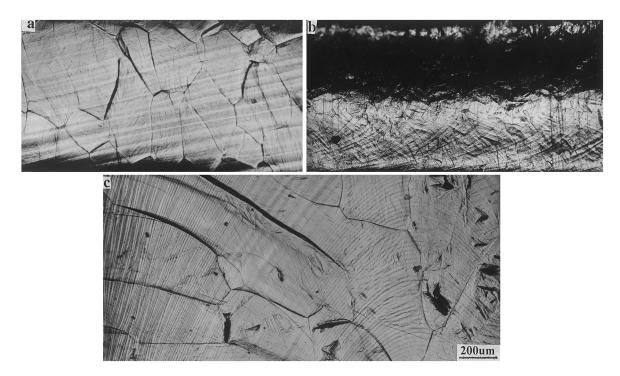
Joint surface of Ti welding samples (a) EBW; (b) LBW; (c) TIG.
